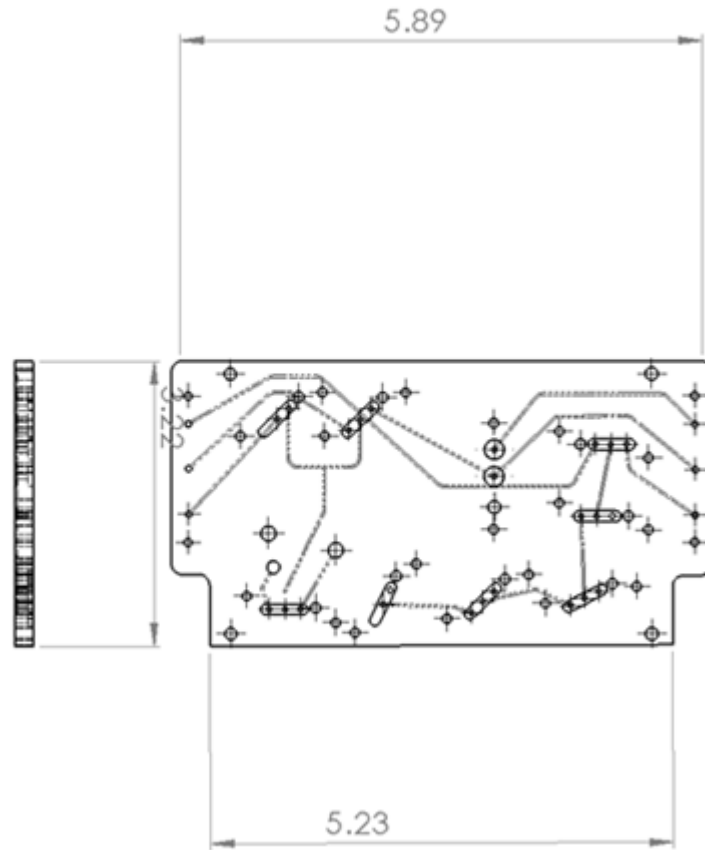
Dimensions of the perimeter of the hydraulic manifold performed on the CAD software. The design is for the future polycarbonate prototype and has the structural screws from the original design removed.
